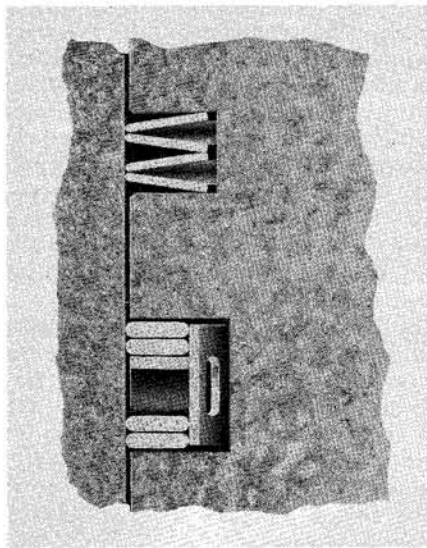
Proper installation arrangement of segmented third compression and upper oil control rings. See text for details.
